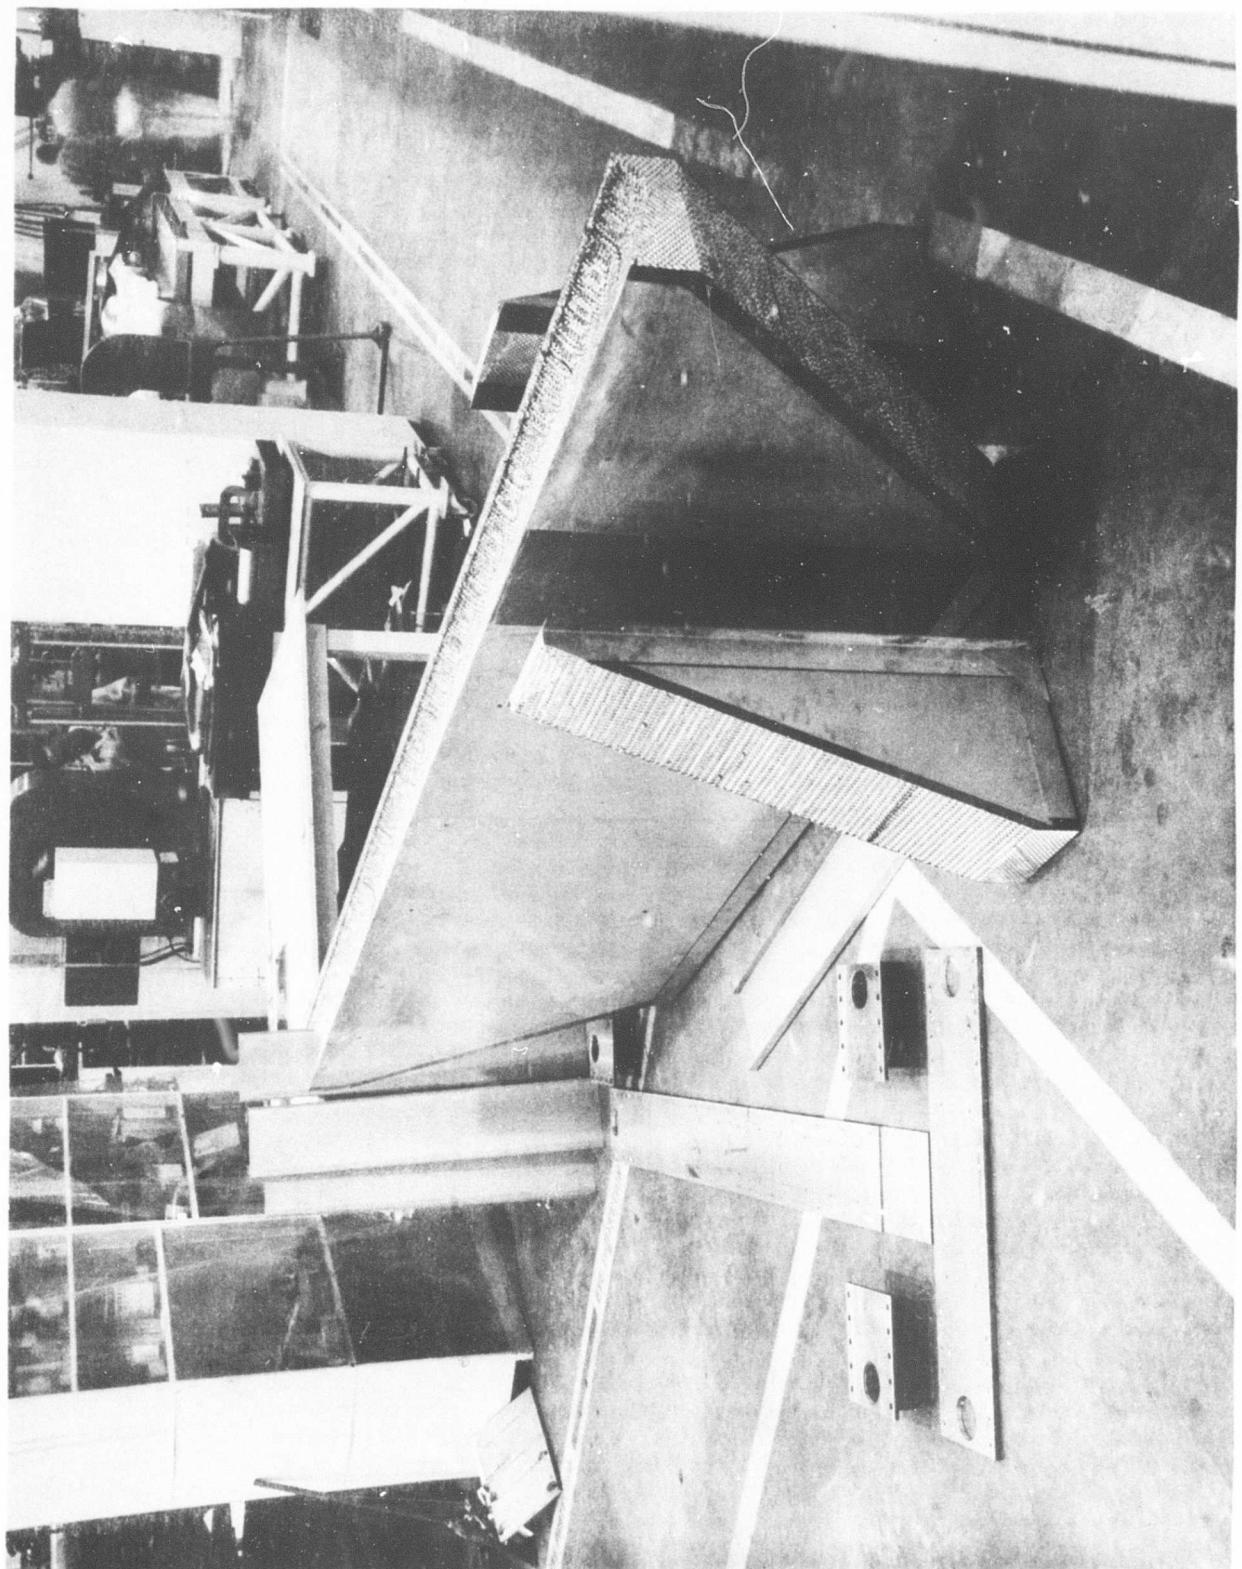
Fabricated "Trussgrid" Core Blocks Prior to Bonding into Sandwich Beam Assembly.
